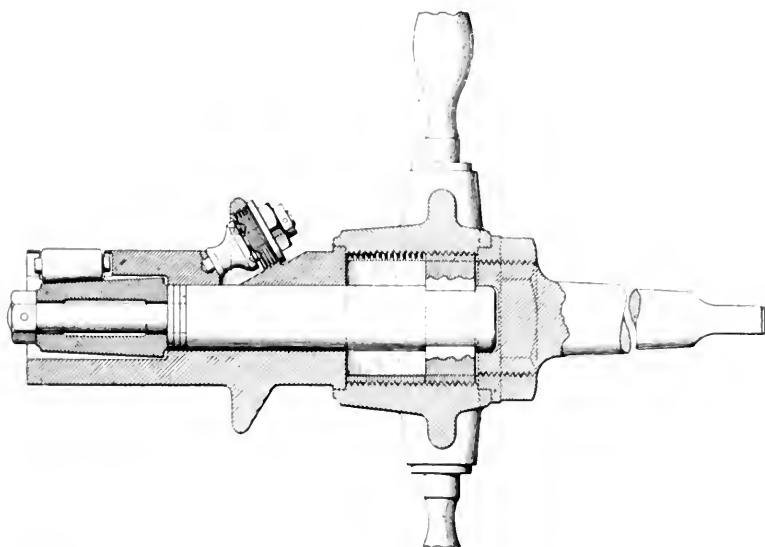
Lovekin patent expanding and beading tool for copper pipe only.
